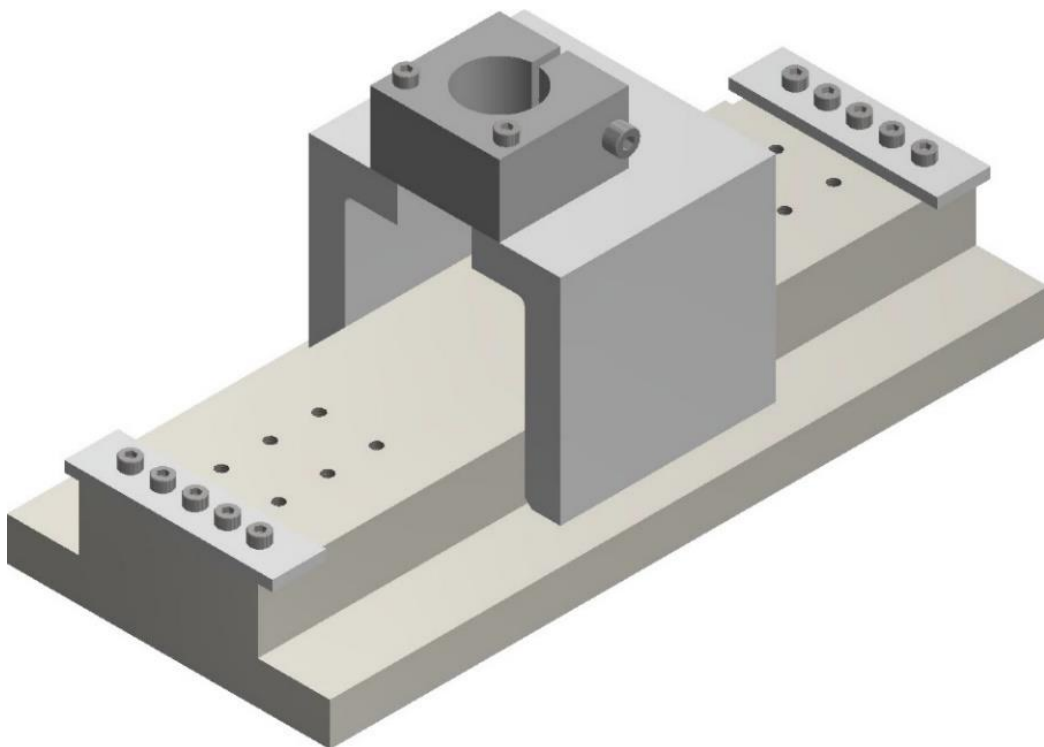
Drawing of carriage and support of the abrasive peeling setup.
